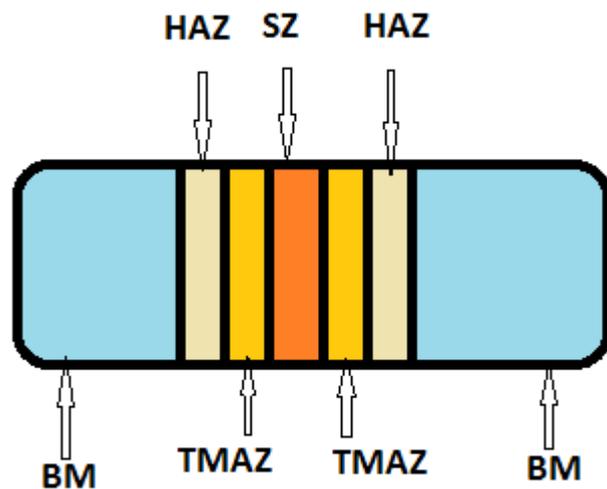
Schematic illustration and location of different welding zones in FSW, FSSW and PFSSW
